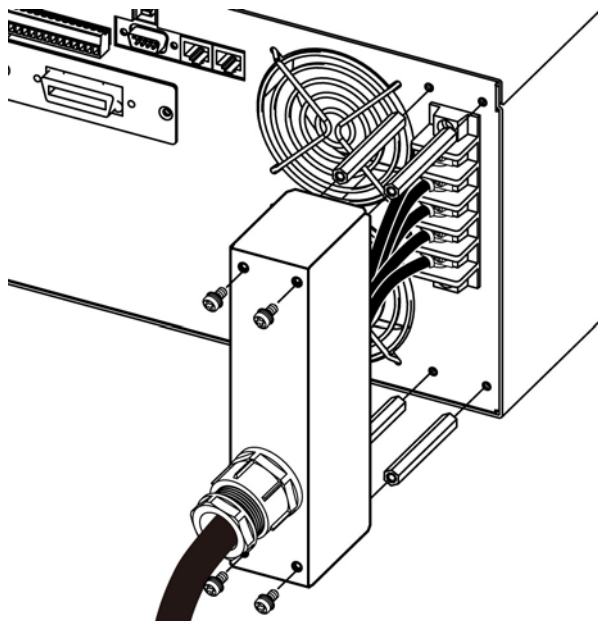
Assembling 62050P Input Terminal Safety Cover – 3
